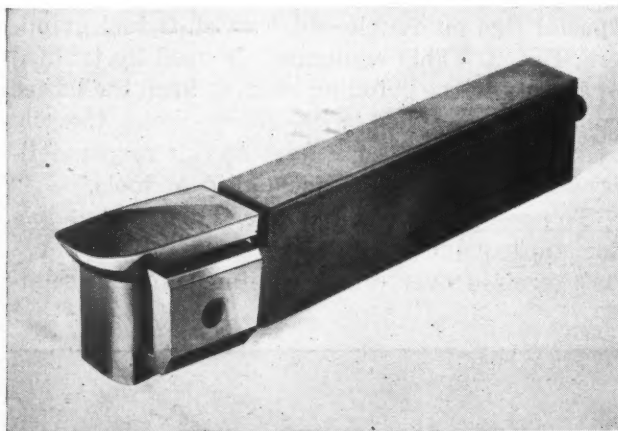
(Above) Specially designed "clamp-on" tool used in finish-turning axles to the proper finish
